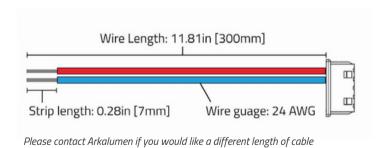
Intensity Level Dim-to-Warm Cable Assembly
